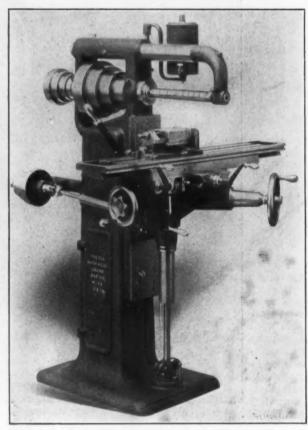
The No. 3½ Hand and Power Miller Made by the Fox Machine Company, Grand Rapids, Mich.
